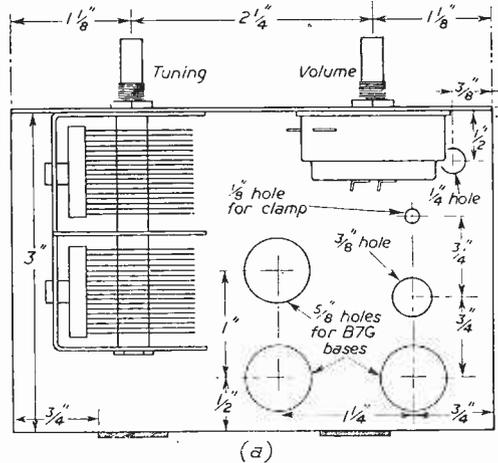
Aluminium chassis and layout. (Top of chassis.)
